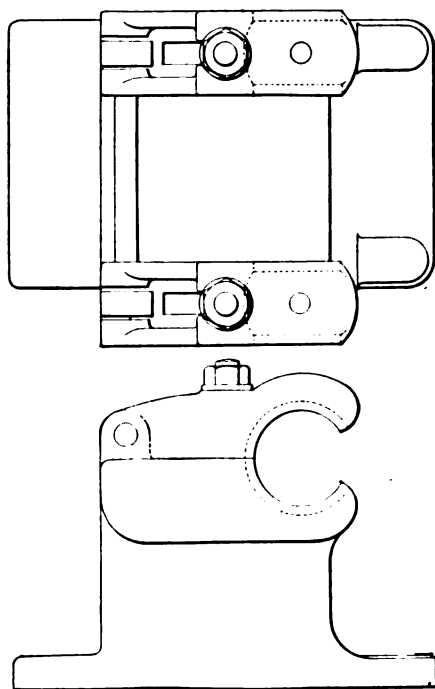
SPHERICAL BEARING SEATS IN GRINDER HEAD
